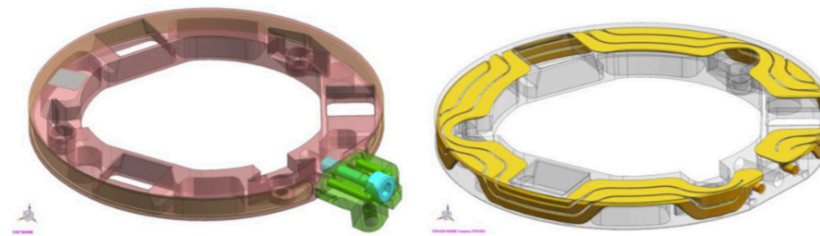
Thermal conditioning ring with milled cooling channels enclosed by a welded cover (left) and with additively manufactured conformal cooling channels (right). Courtesy of ASML.
